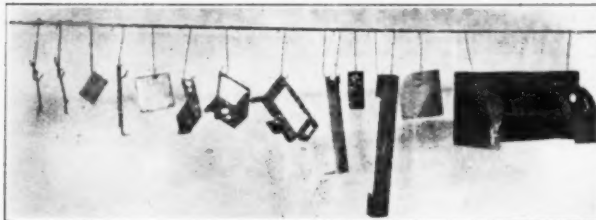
SHOWING PARTS MAKING UP A COMPLETE CABINET
